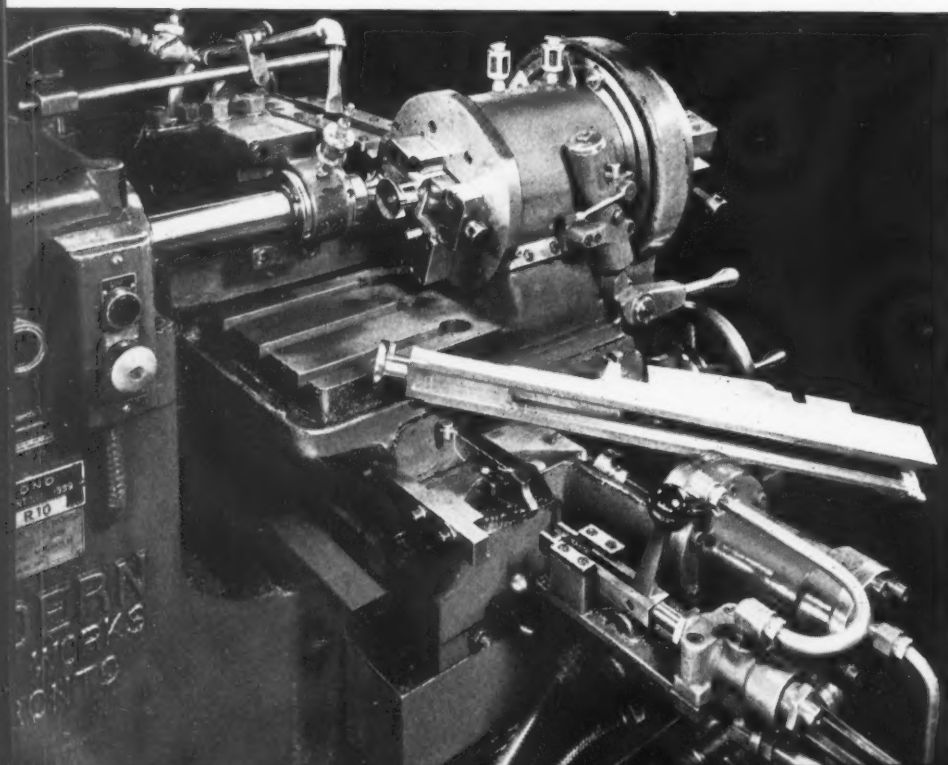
Bore-Matic Employed for Rough- and Finish-boring and Counterboring the Hole that Receives the Piston
